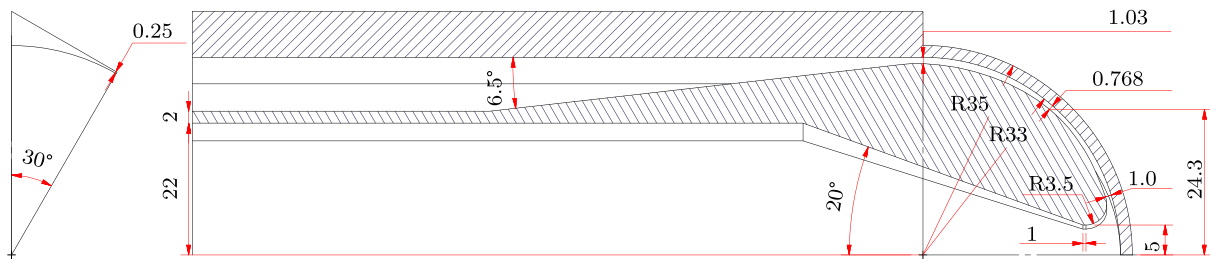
Dimensions (in mm) of a 30° sector of a receiver unit.
